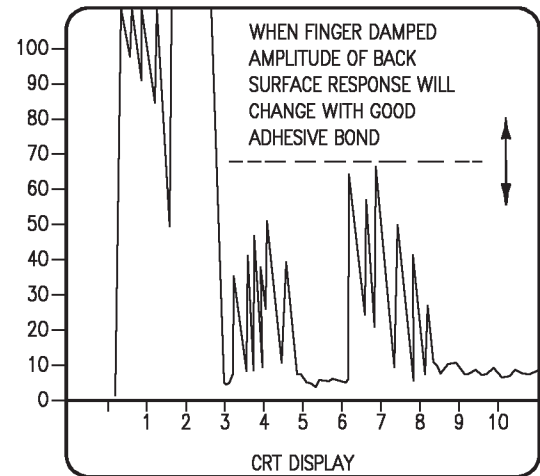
Inspection Procedure for Bonded Aluminum Doublers on Bulkhead, Using C-398 Ultrasonic Flaw Detector (Sheet 1)
